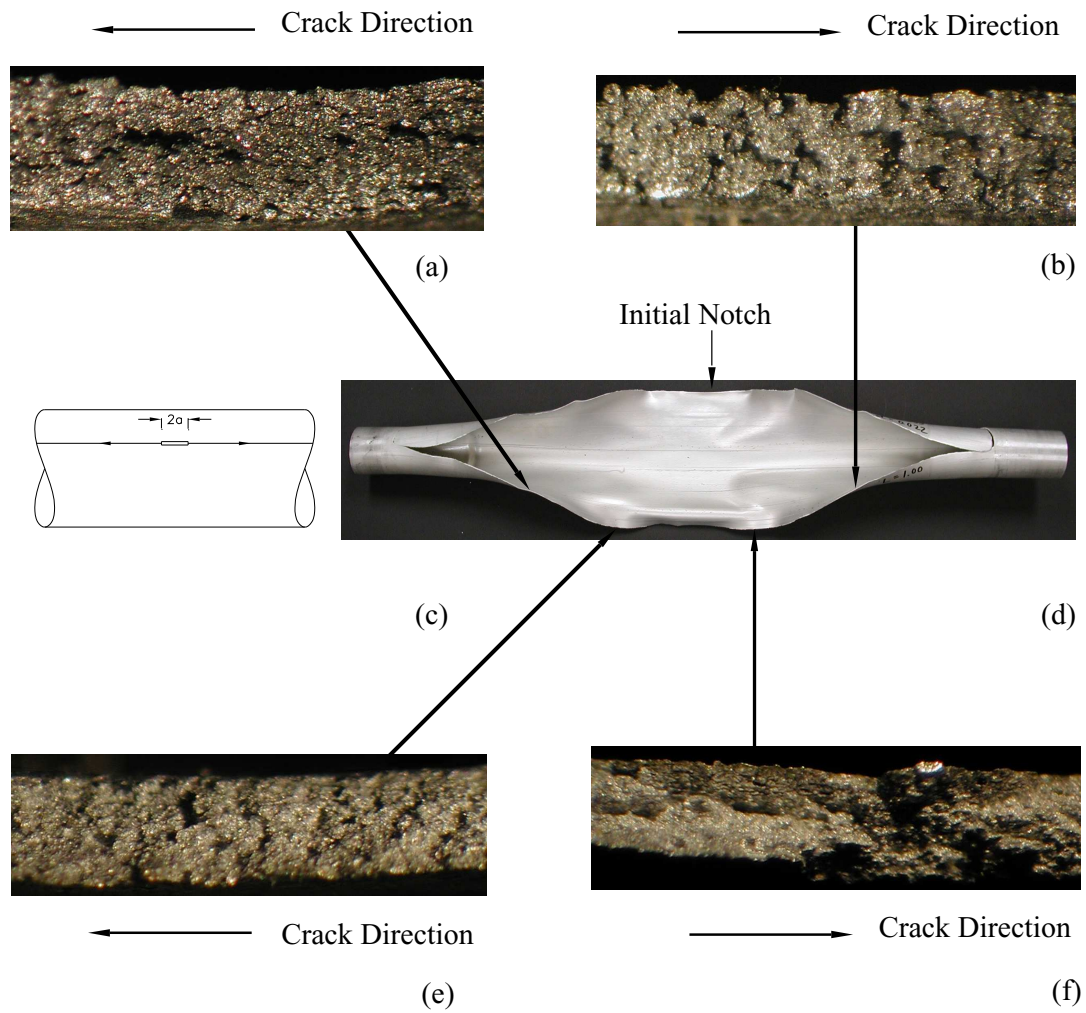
Fractographs, post-test specimen, and crack path schematic for a tube fractured under gaseous nitrogen loading.
